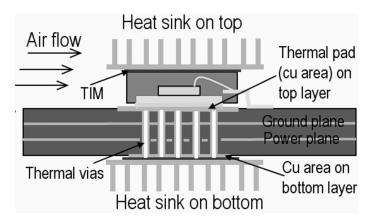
Thermal Management of the SIMPLE SWITCHER Power Module on a 4-Layer PCB
